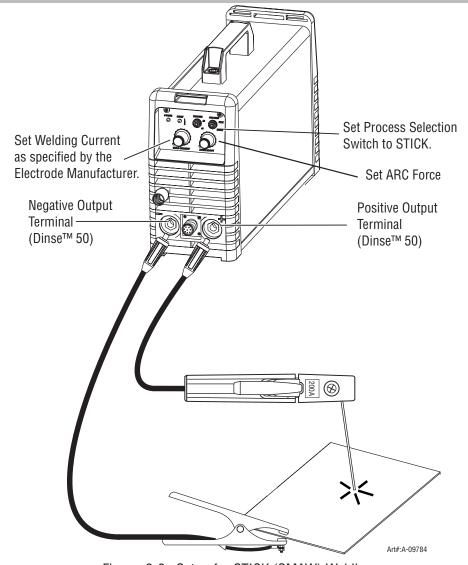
Setup for STICK (SMAW) Welding
